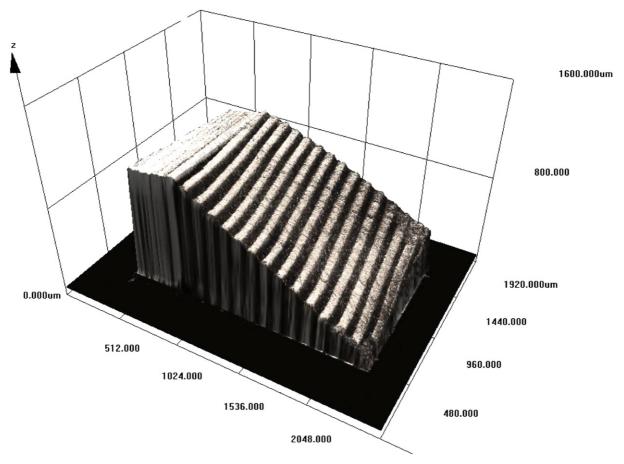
3D reconstruction of the fracture surface of SEVNB specimen A1Z2.
